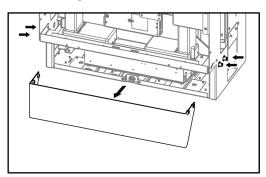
Removing original factory-installed Lower Front Panel (kick plate)
